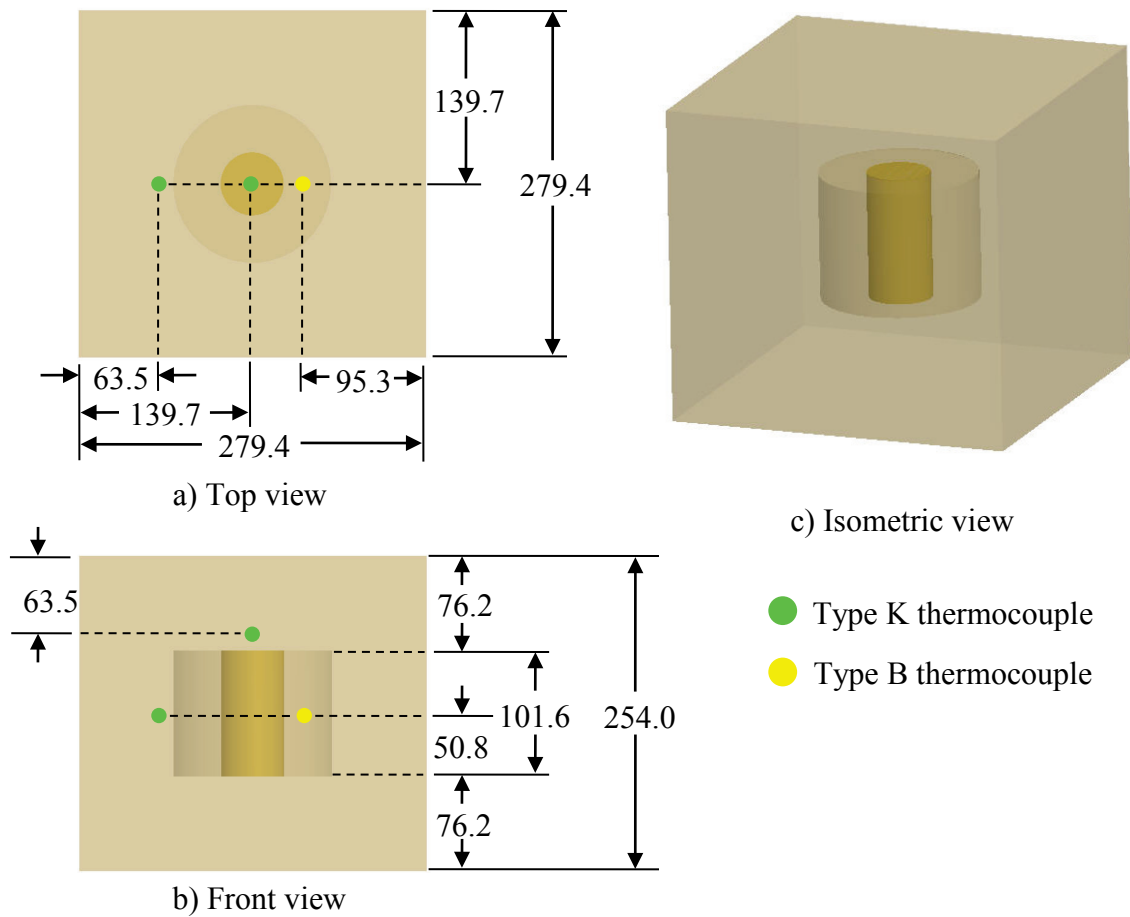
Nominal mold dimensions and thermocouple placement. All units in mm.
